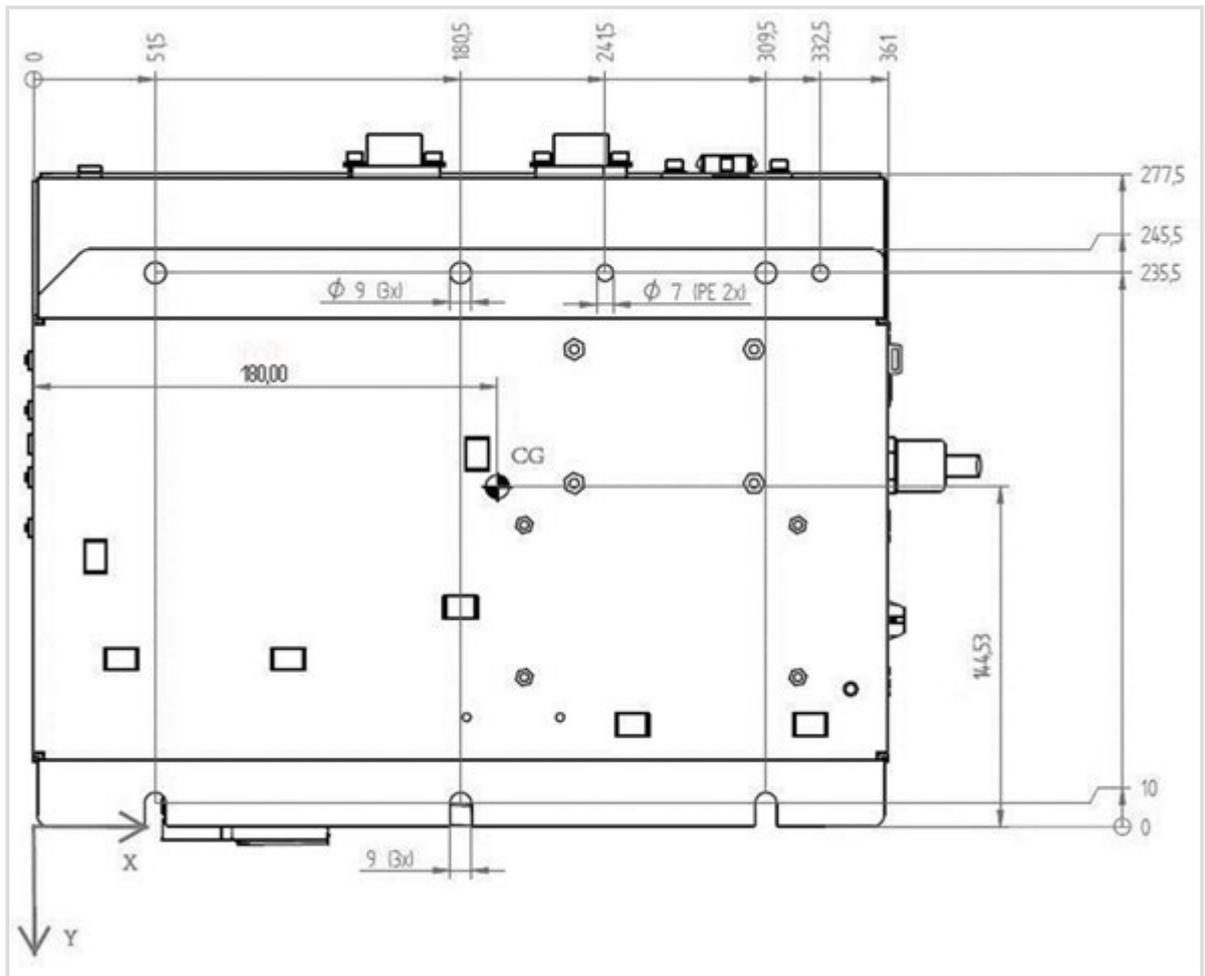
Mechanical dimensions of the System Interface Unit (top view)
